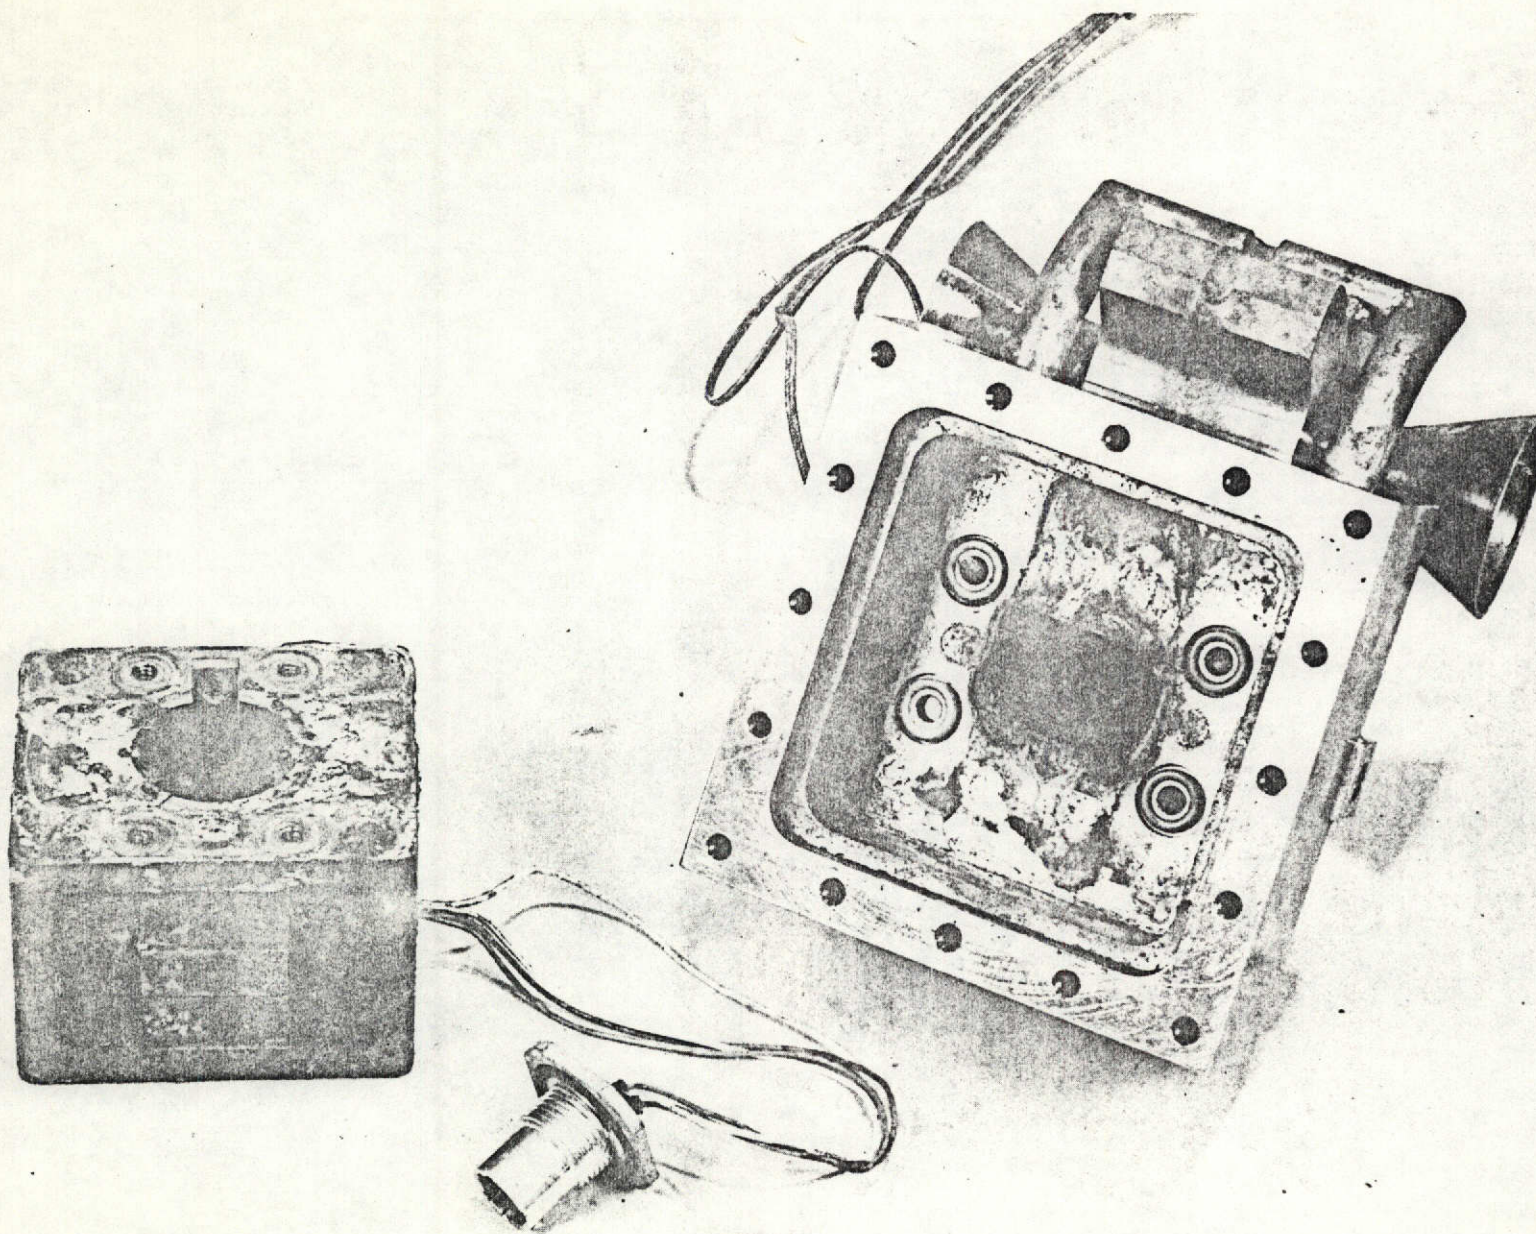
Complete Disassembly of FET After Hot Gas Test #2
